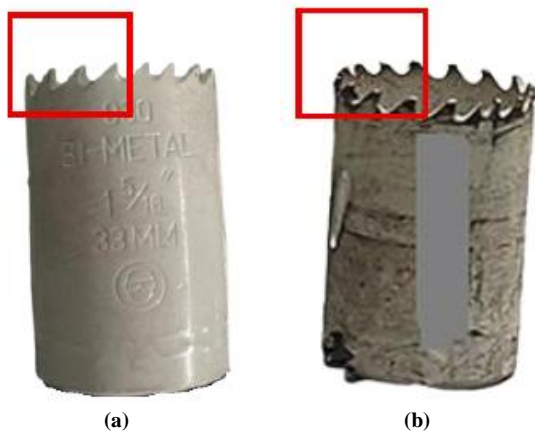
New hole saw with sharp cutting teeth (a) and used hole saw showing wear on the cutting teeth (b)
